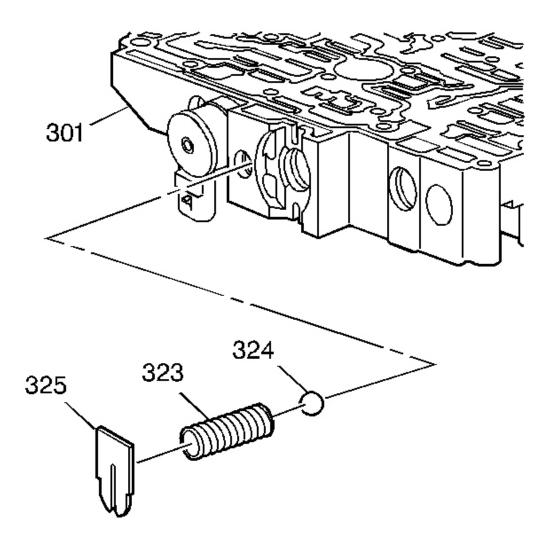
Locating Line Pressure Relief Valve Assembly Courtesy of GENERAL MOTORS CORP.
